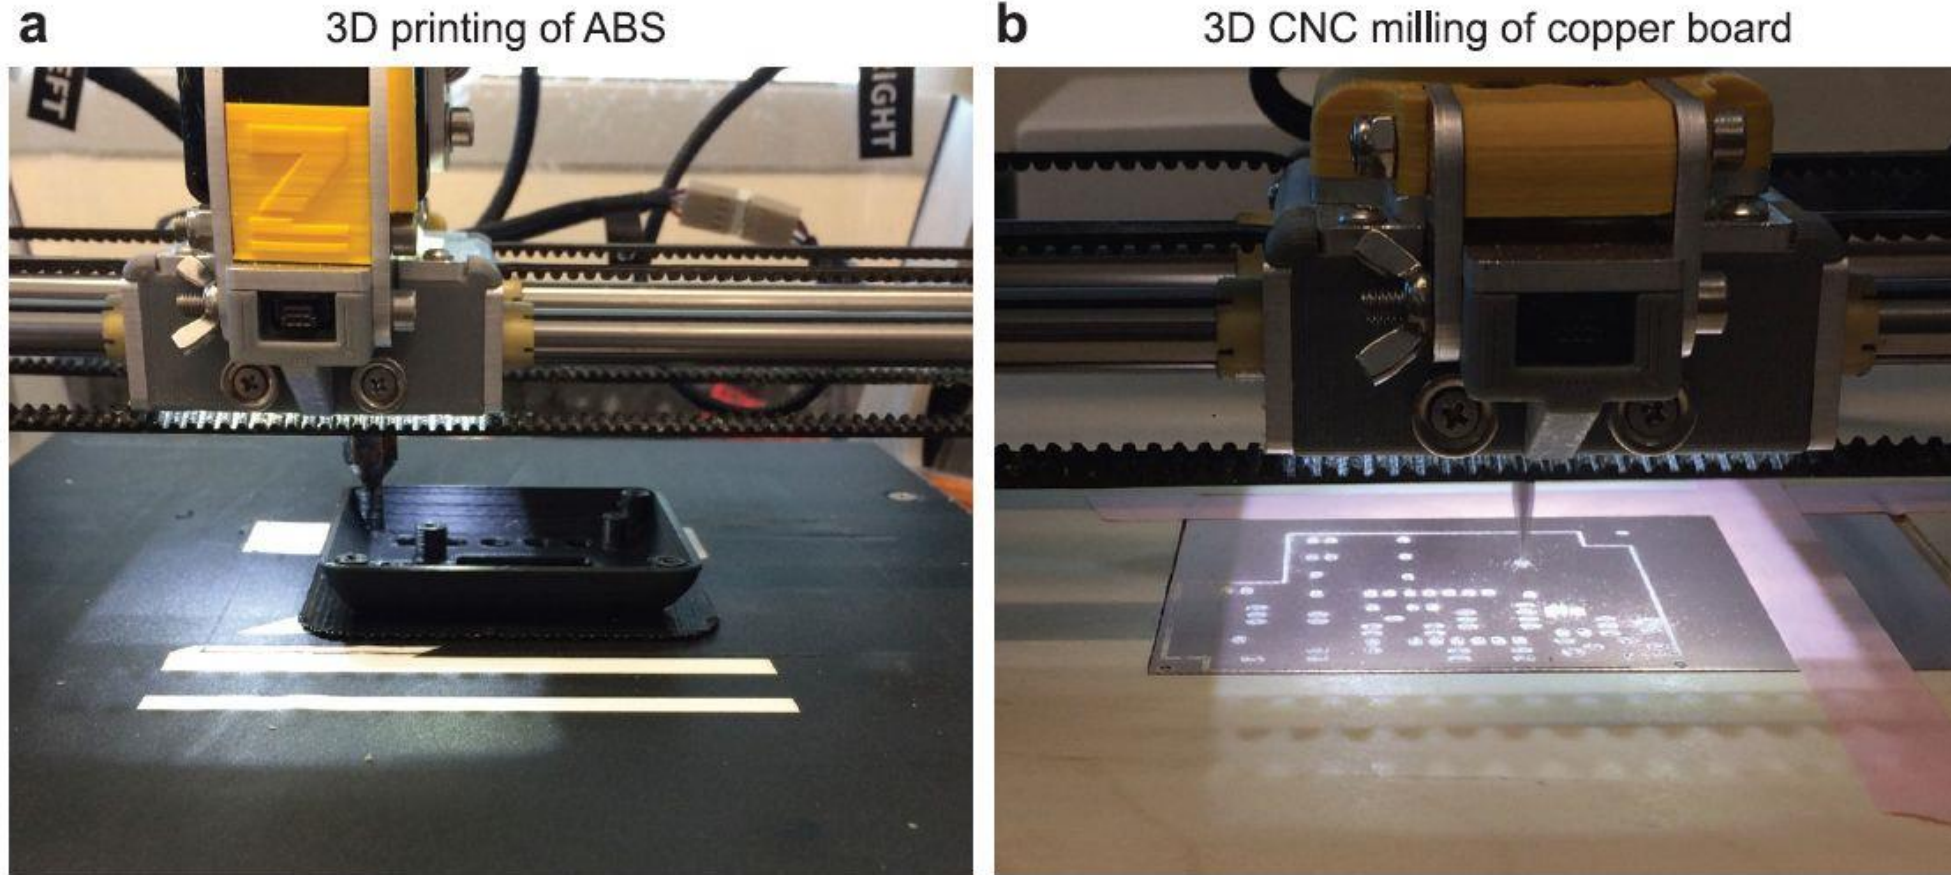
Photographs of 3D printing and 3D milling of all the parts using a multitool 3D printer. (a) The faceplate is being printed with black ABS material on a heated bed. (b) The main board is being engraved using 3D CNC mill.
